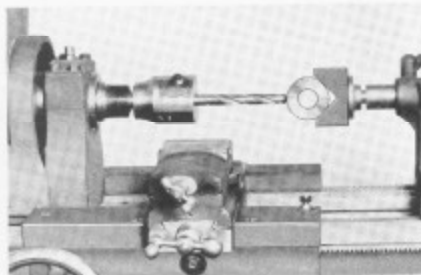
Using a Crotch Center for Drilling Round Shafts
